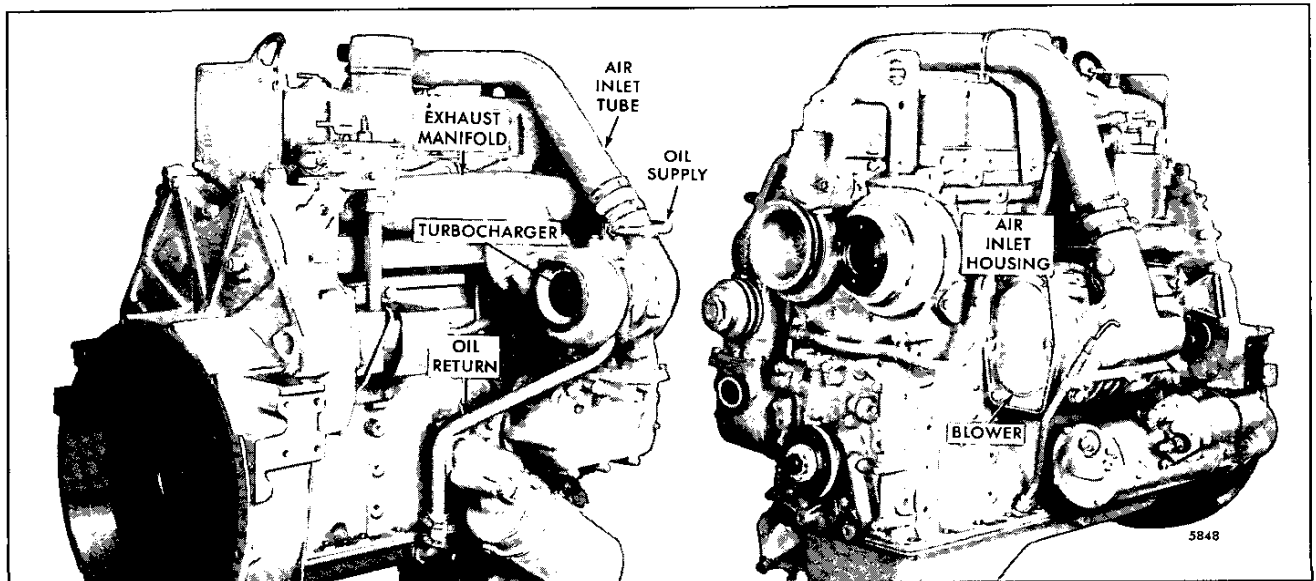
TO4B Turbocharger Mounting (In-Line Engine)
